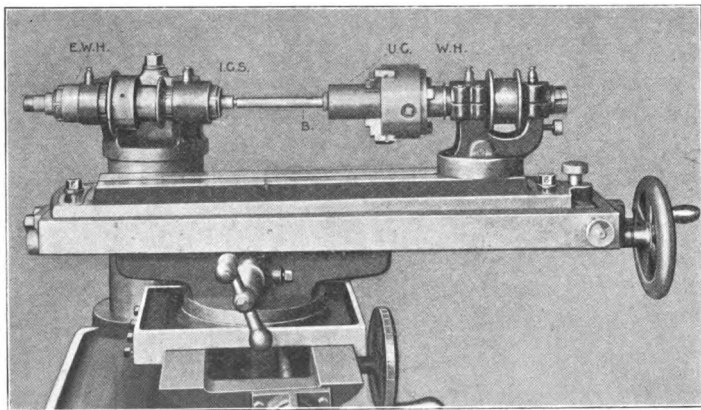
“Ward” Machine grinding Steel Bush internally.
